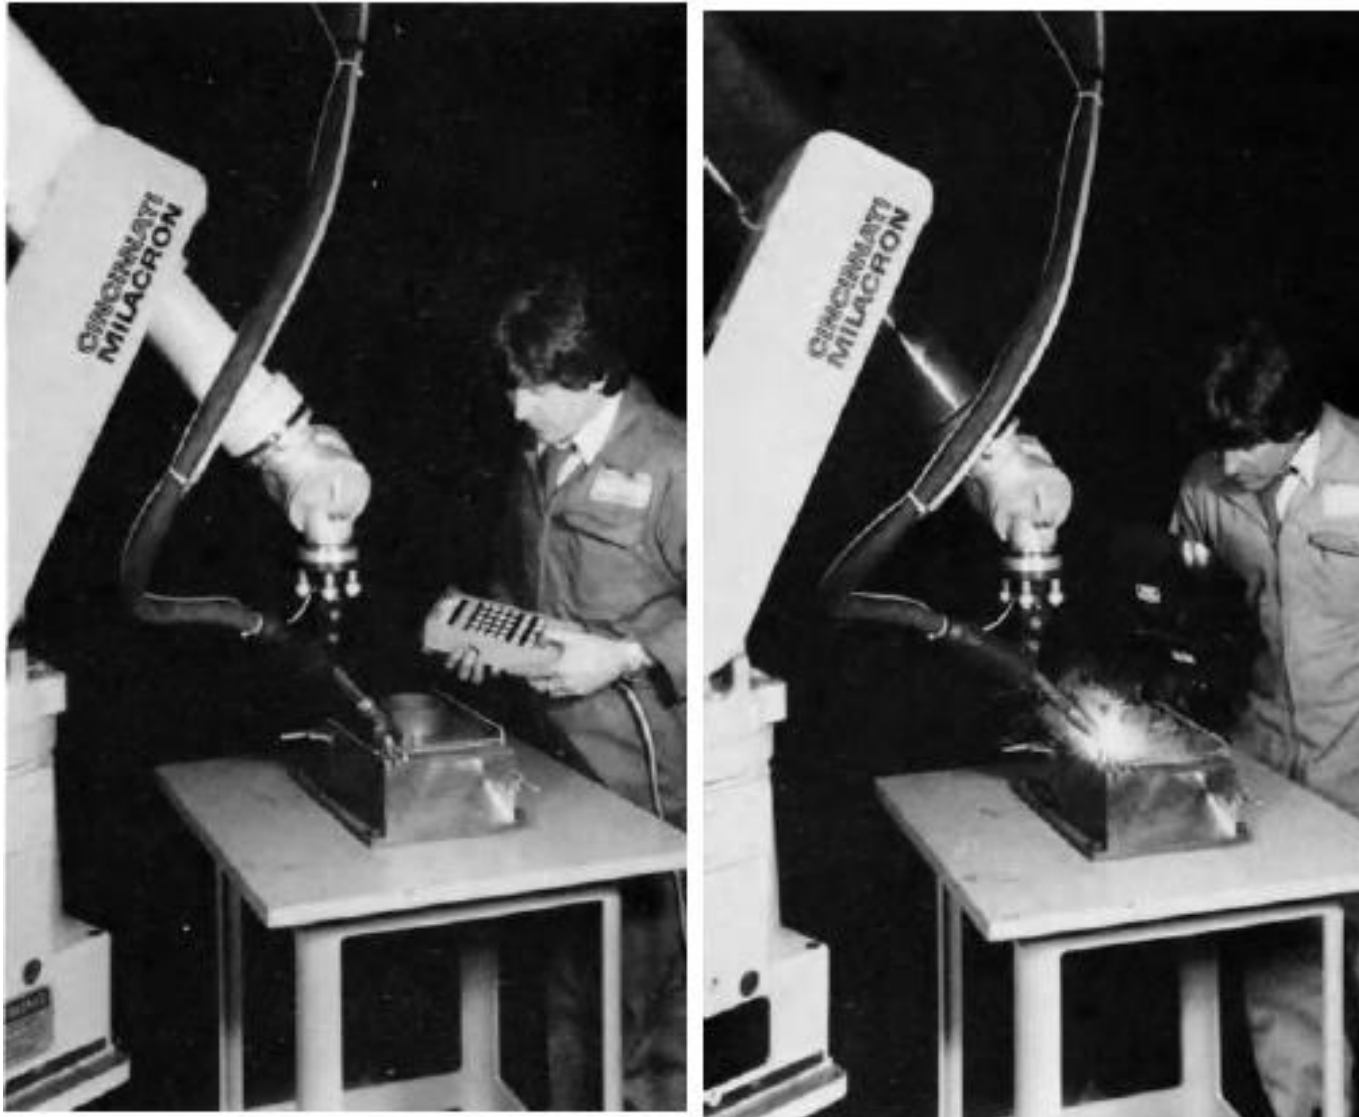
A Cincinnati Milacron T<sup>3</sup>-726 arc welding a circular seam (courtesy Cincinnati Milacron).
